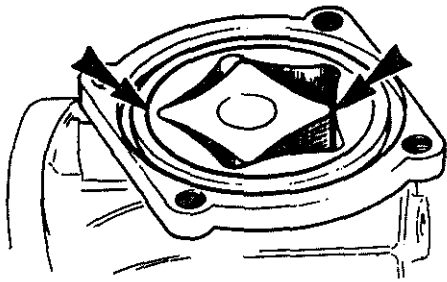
CHECKING ROTOR SIDE CLEARANCE
